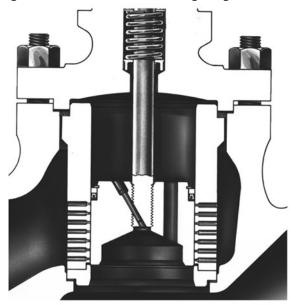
Typical ENVIRO-SEAL Bellows Seal Bonnet and Bellows Seal Assembly
